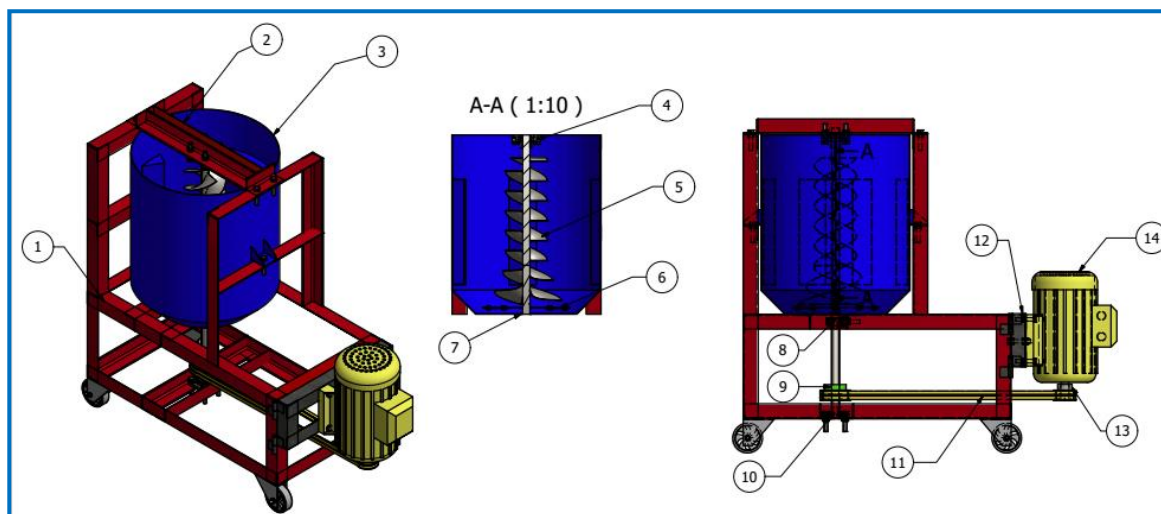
Design of Paper Pulper Machine (a) Isometric view (b) Left view
